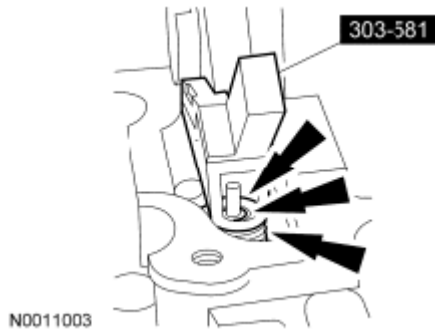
Locating Valve Spring Retainer And Retainer Keys
